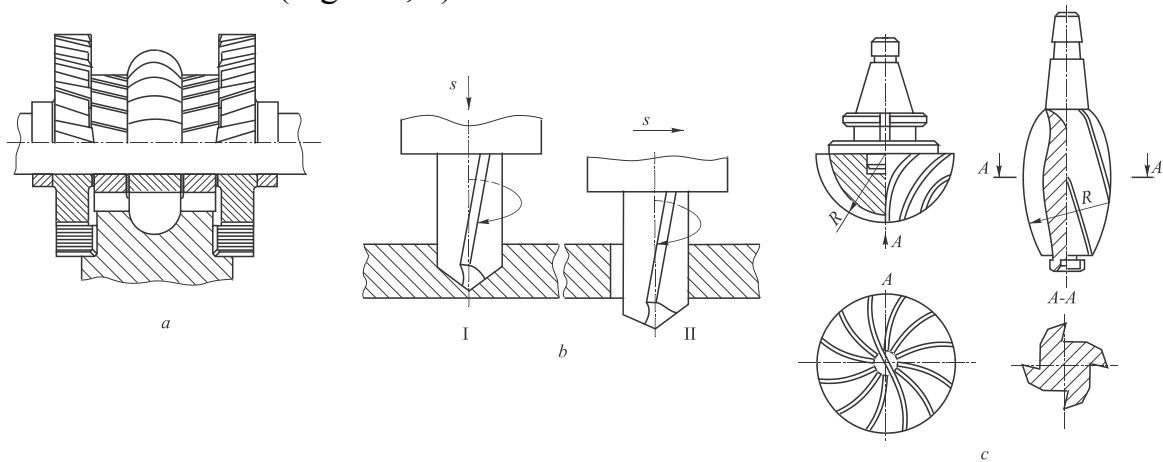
Milling cutters: (a) gang cutters; (b) mill-drill; (c) form milling cutters
